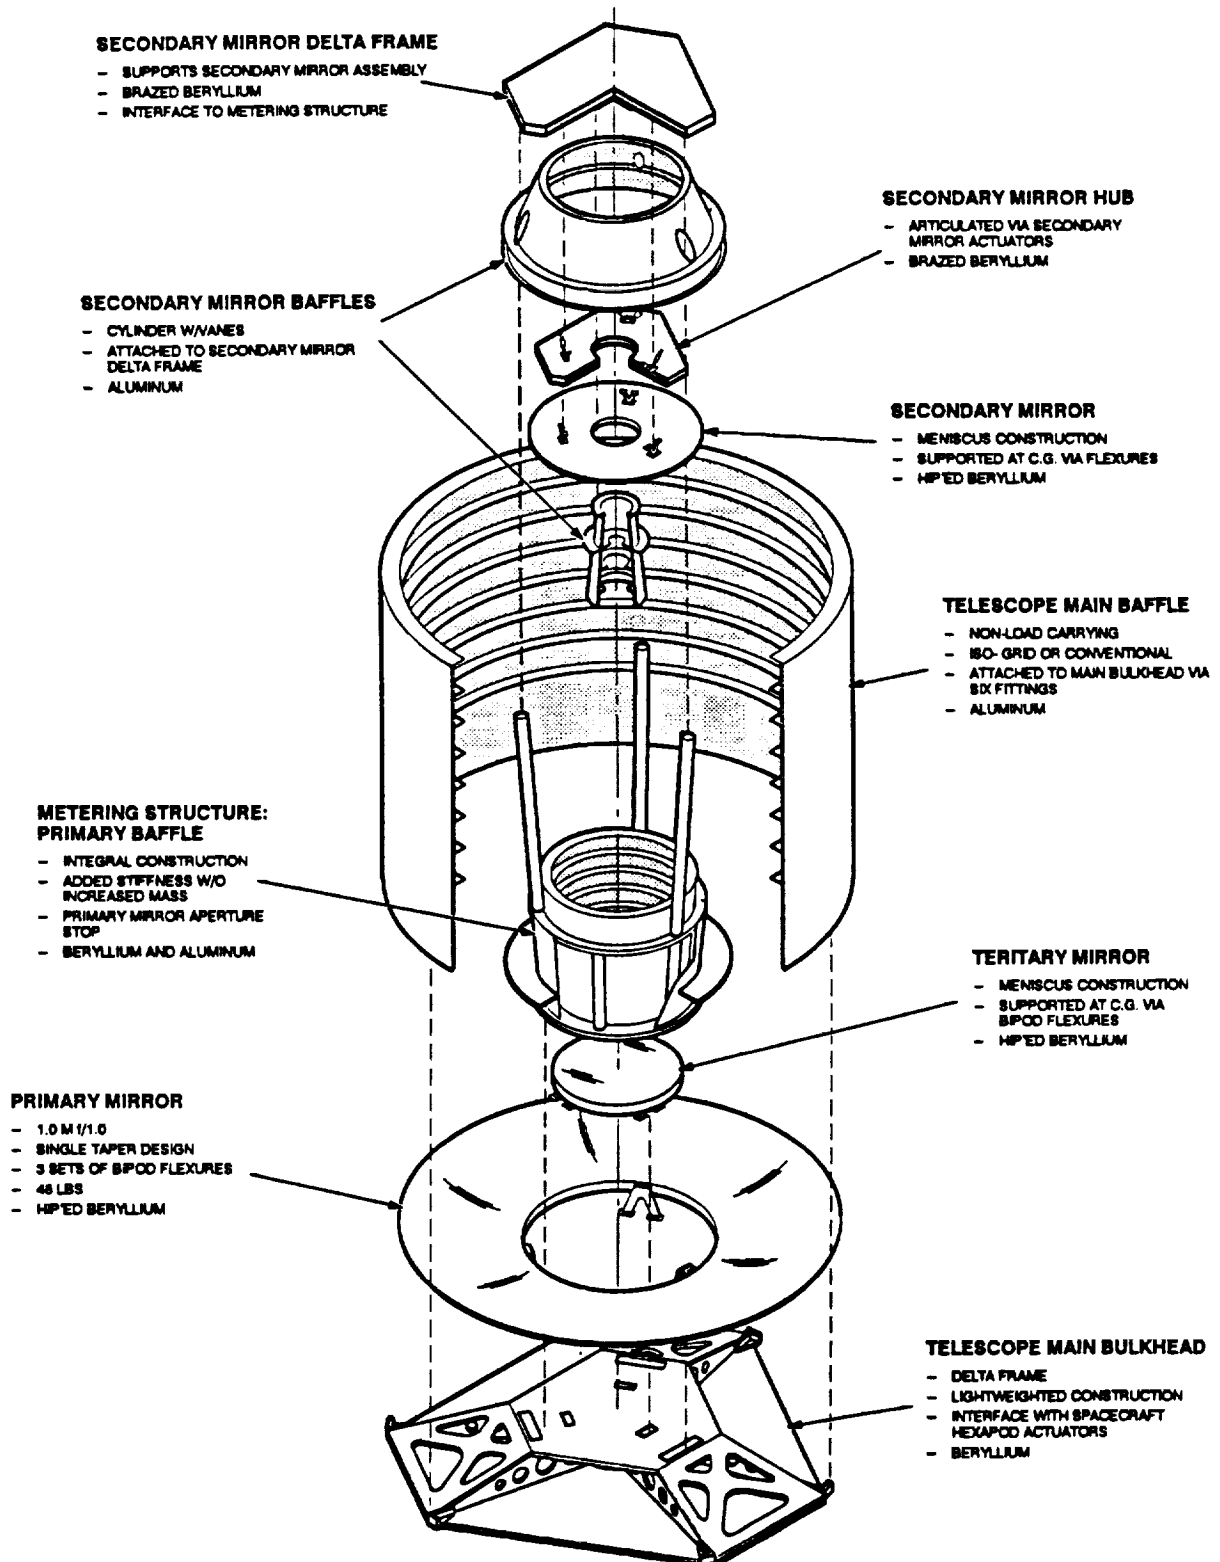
The "Exploded" View of the Lute Telescope Provide Insight into Assembly Sequences along with Material and Fabrication Techniques.
